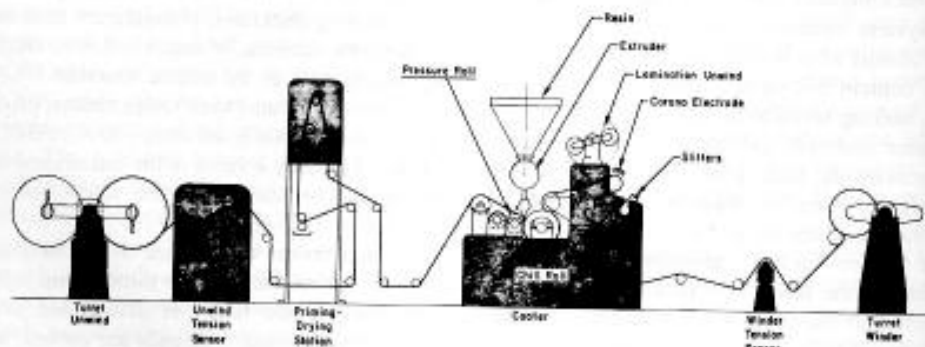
Typical extrusion coating line. (Courtesy E. I. du Pont de Nemours & Co., Inc.)
